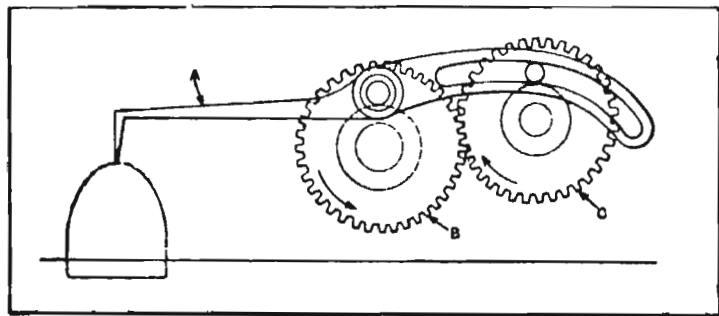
Crank and Cam Combination for Operating Claw Mechanism of Moving Picture Camera
